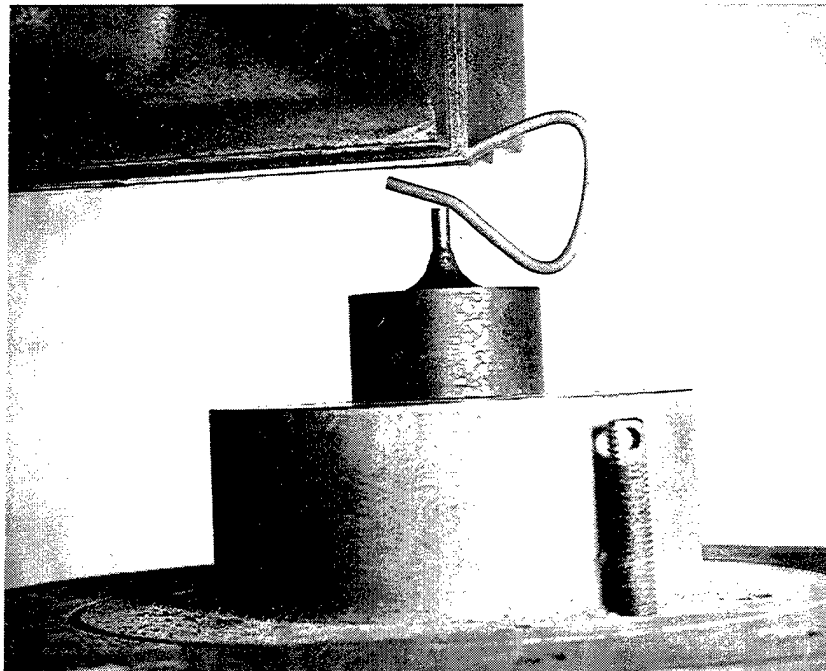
Close-up view of the spring sample showing the free end compressed close to the clamped end in the machine vise while under compressed load.
